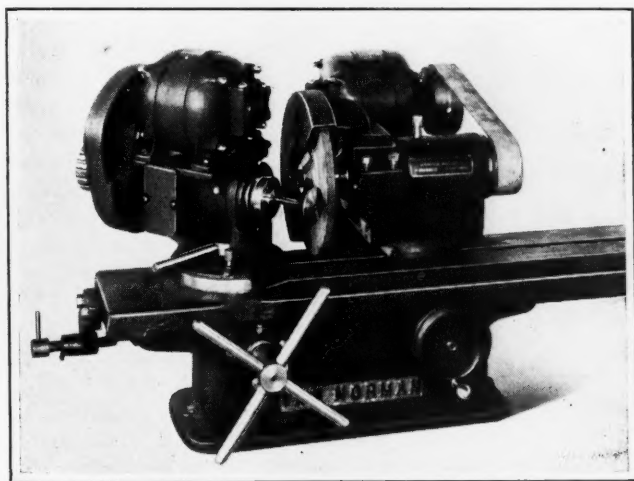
Grinding an Automobile Engine Valve with Work-head set in an Angular Position
